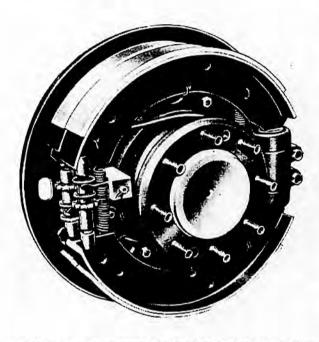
THE DUO-SERVO BRAKE (HYDRAULIC).
